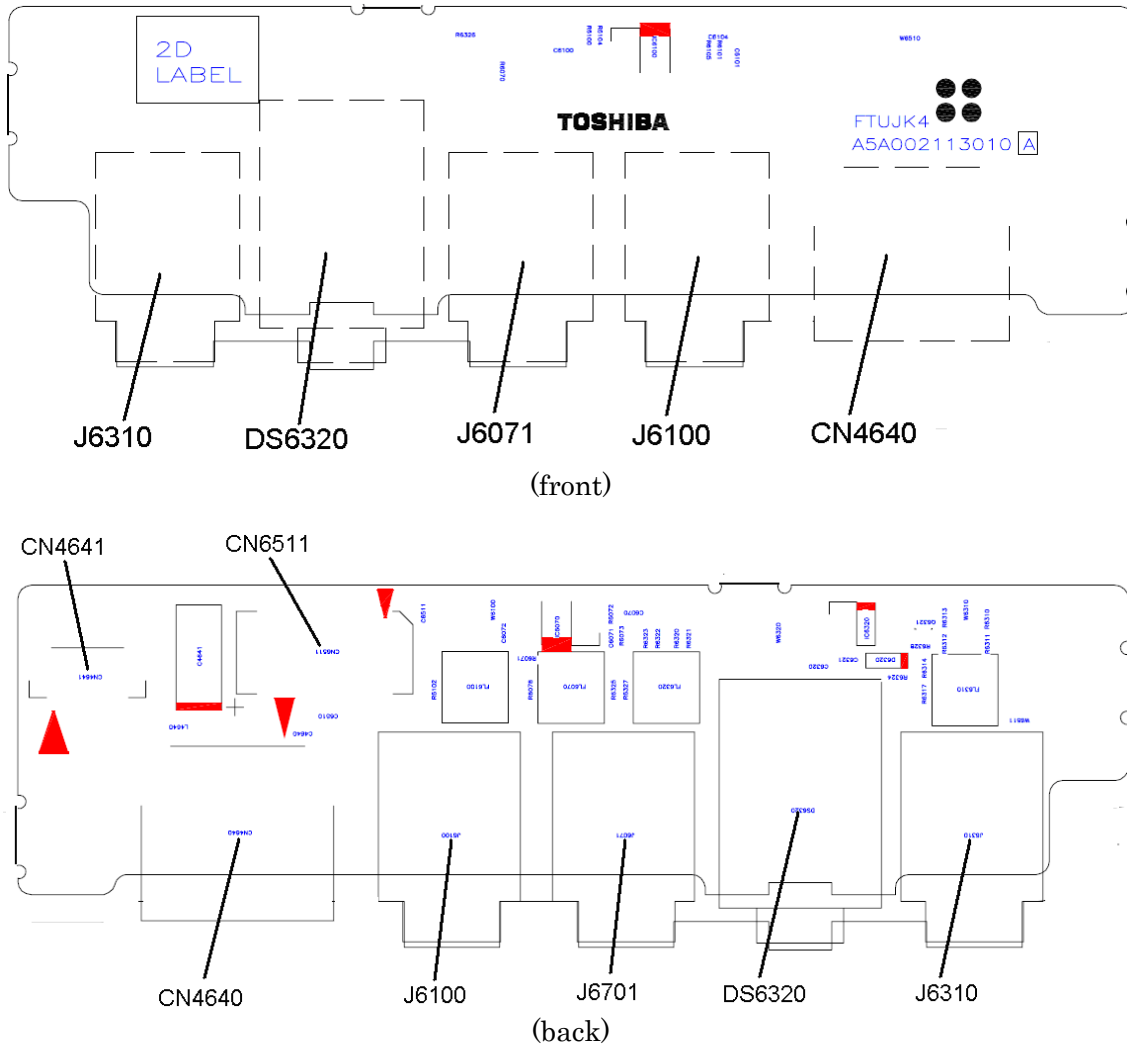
Sound/USB Jack board (FTUJK\*) layout (front/back)
